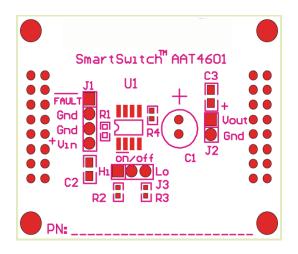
AAT4601 Evaluation Board Top Side Silk Screen Assembly Drawing.
